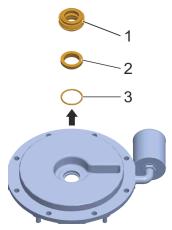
Removing the mechanical seal (example: herborner.F-N/herborner.F-N-PM)
